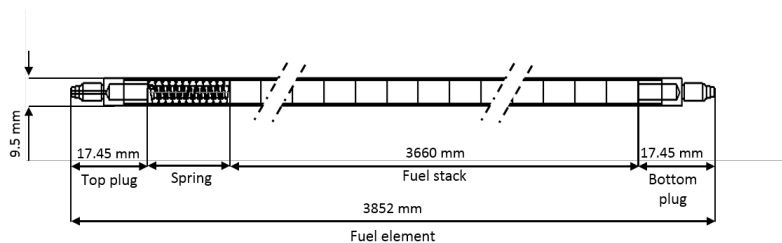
Scheme of a PWR fuel rod showing the geometrical configuration and the characteristics dimensions
